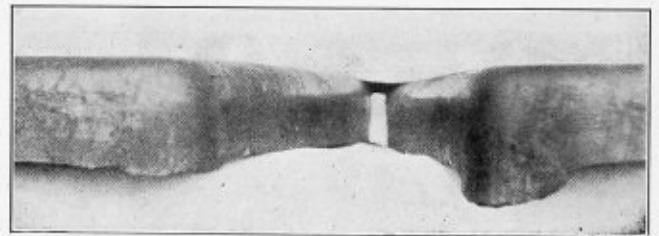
CORNER OF LEFT-HAND PLATE WAS CORRECTLY SHEARED FOR FLANGING. CORNER OF RIGHT-HAND PLATE WAS INCORRECTLY SHEARED FOR FLANGING.
